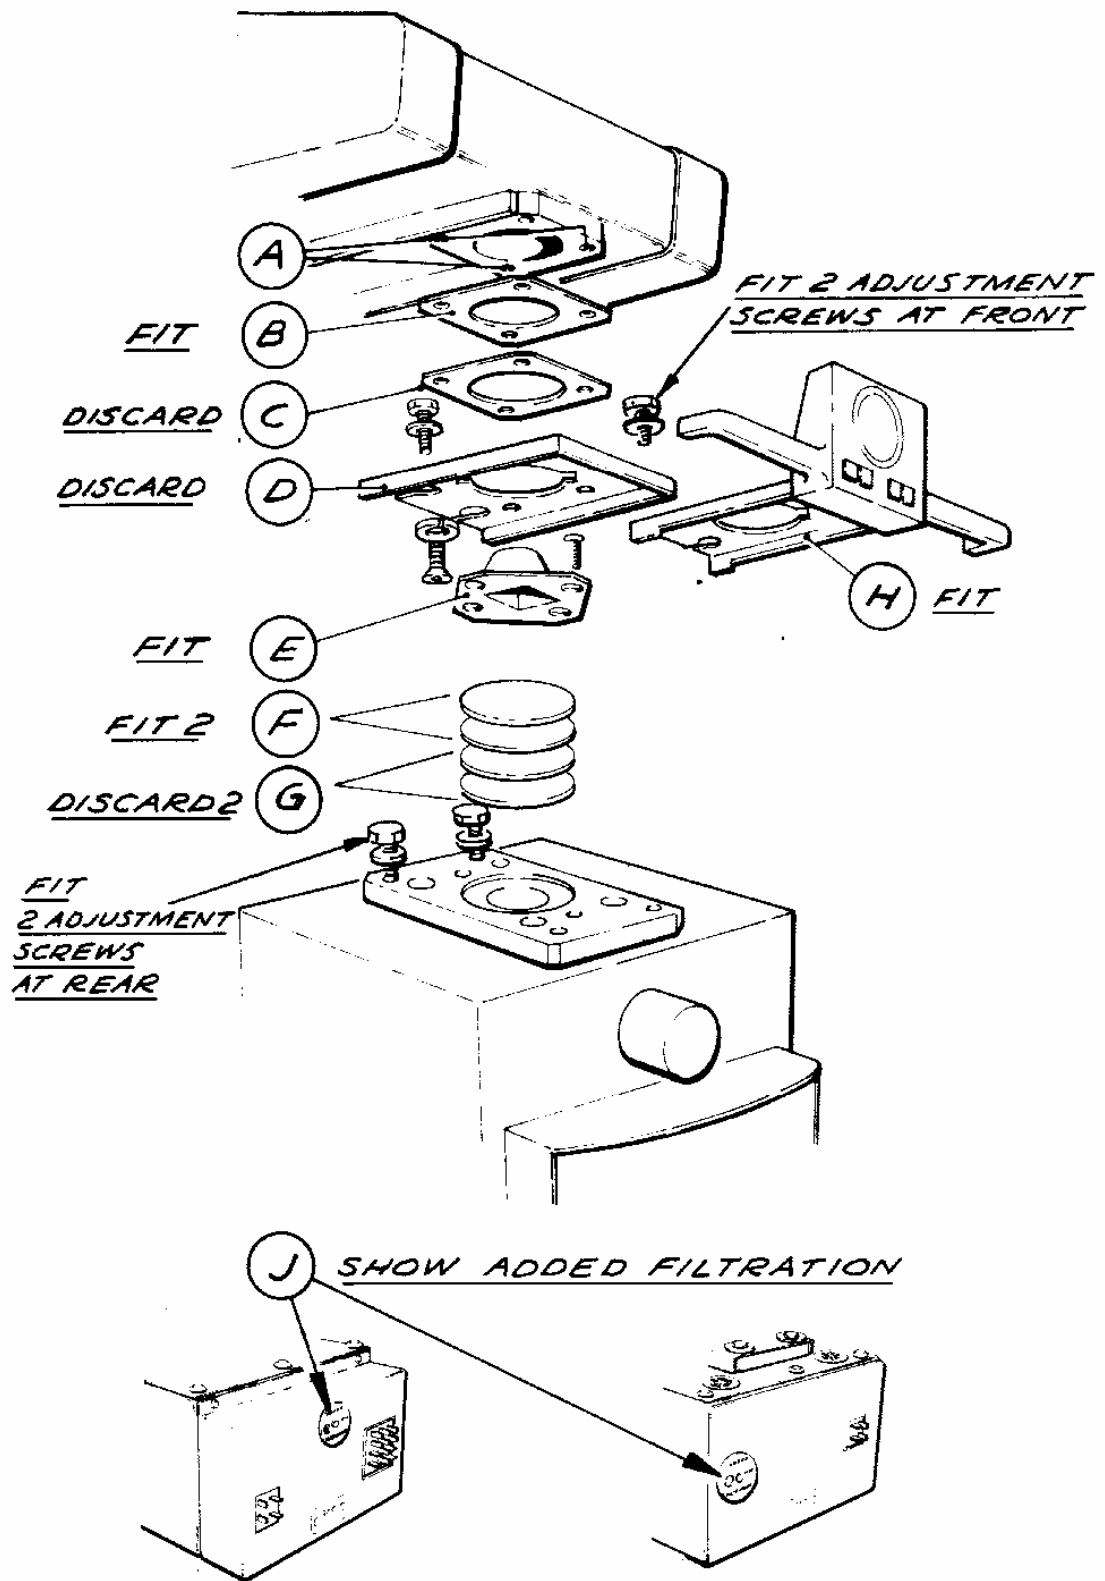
Fitting Demarcator to X-ray Tube with Later Type Switchbox and Setting Filtration Indicator
